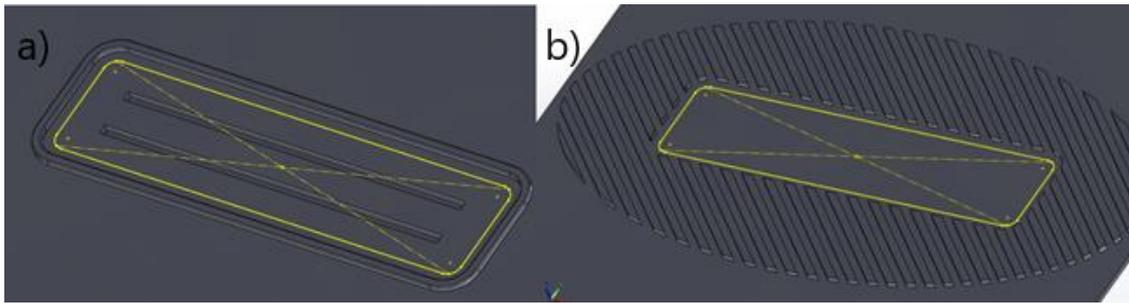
Two different configurations with stiffened features for emboss guarding. a) has stiffeners inside the feature, as b) has larger stiffened frame outside of the feature.
